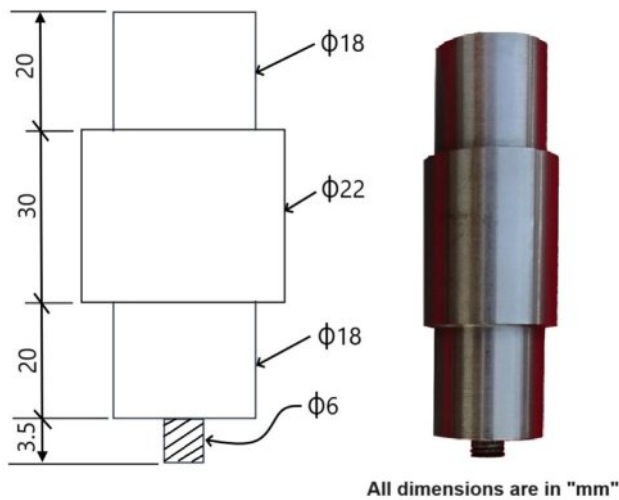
Fabricated H13 FSP tool and its Dimensions.
